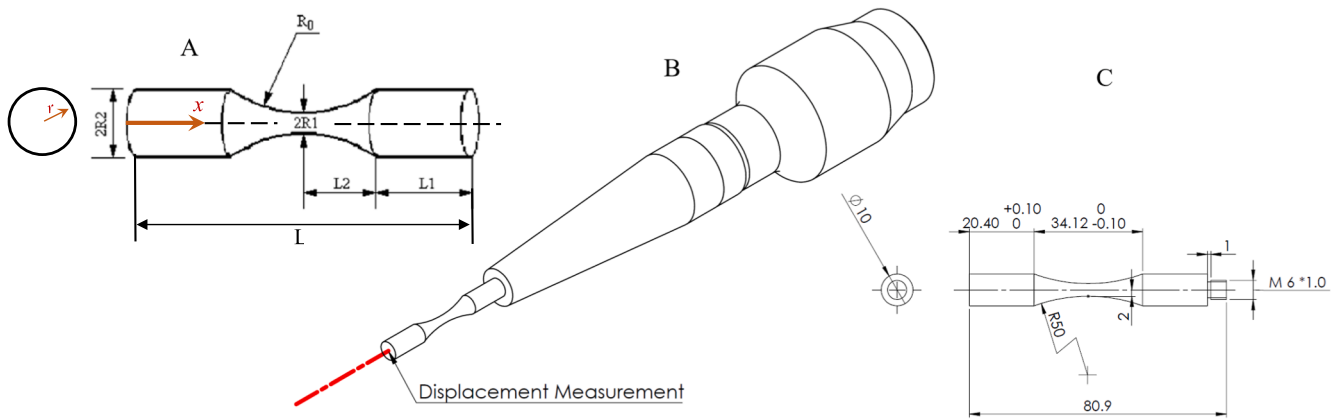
Tension-compression uniaxial ultrasonic fatigue test specimen and setup: [A] Hourglass specimen key general dimensions; [B] Booster-horn-specimen setup with displacement measurement representation; [C] AISI P20 specimen dimensions. All dimensional units in mm.
